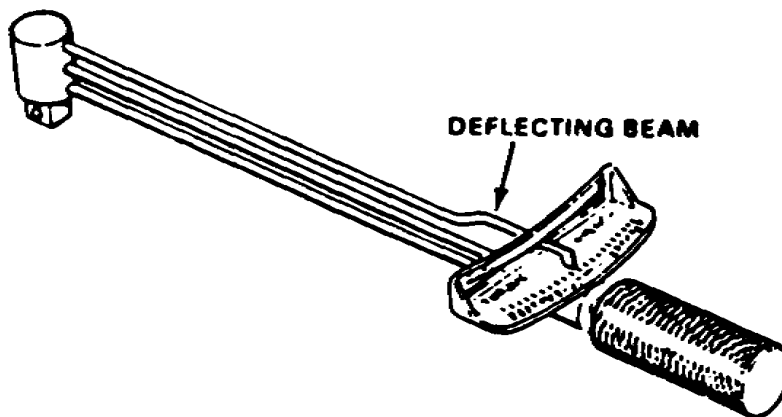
DEFLECTING BEAM TORQUE WRENCH
